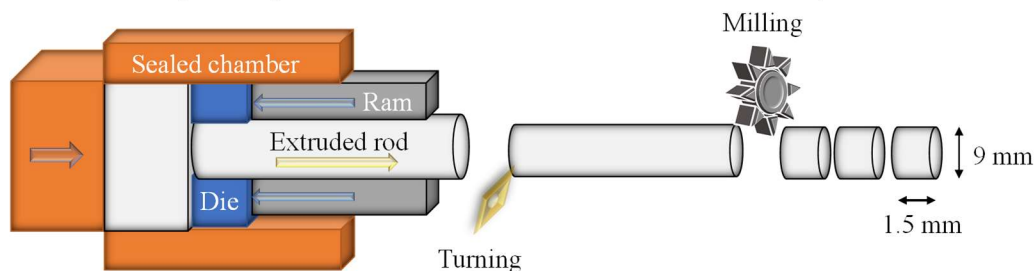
Schematic drawing of the extrusion processing, followed by machining.
